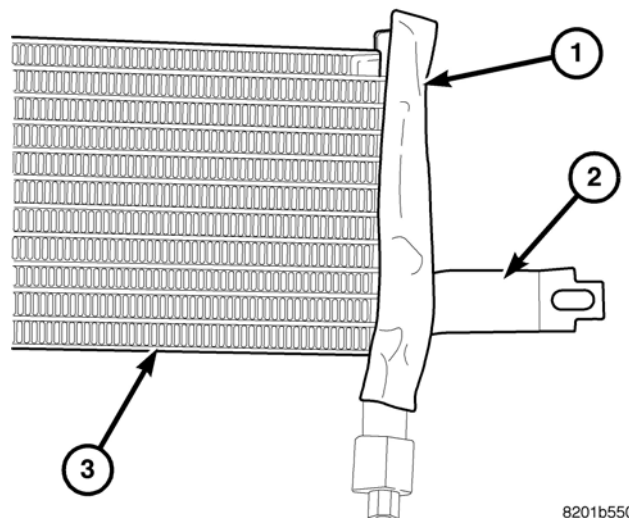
TRANSMISSION COOLER ASSEMBLY - RIGHT SIDE
